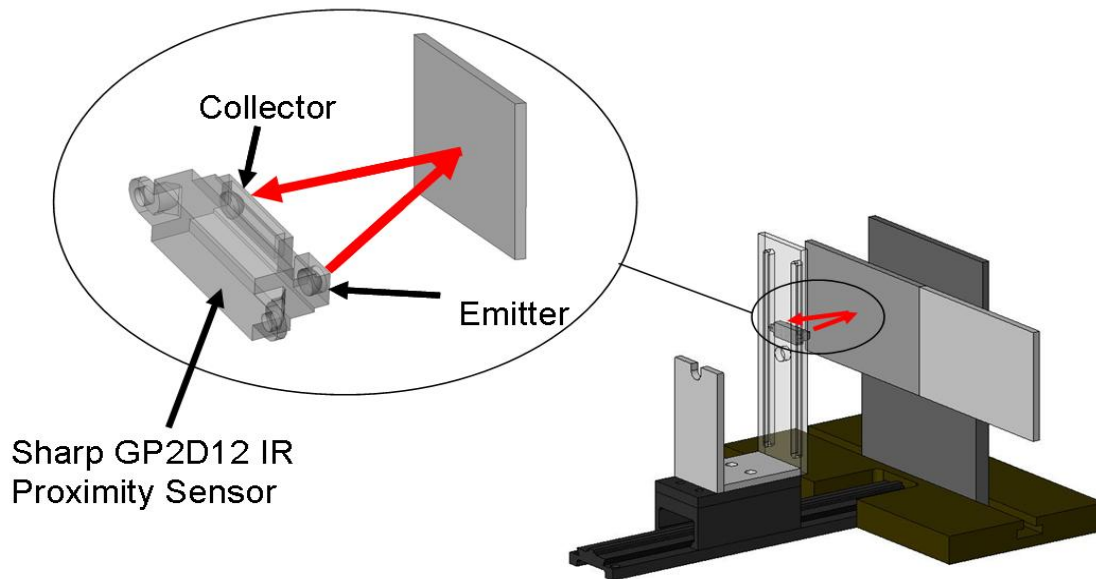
Test fixture assembly used for Sharp GP2D12 IR proximity sensor experiments.
